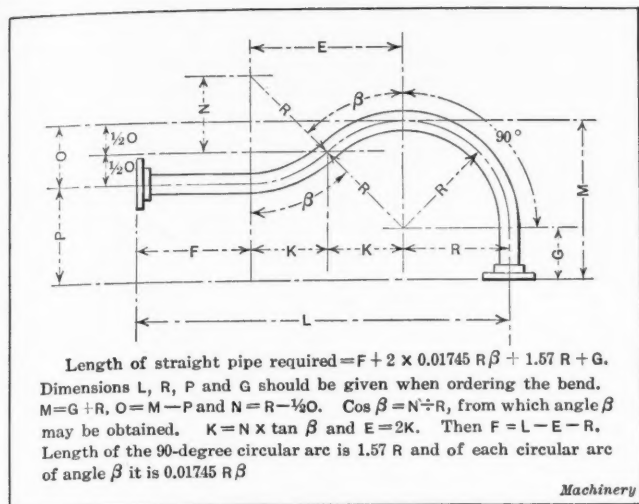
Single Offset Quarter Bend without a Straight Section between the Arcs
